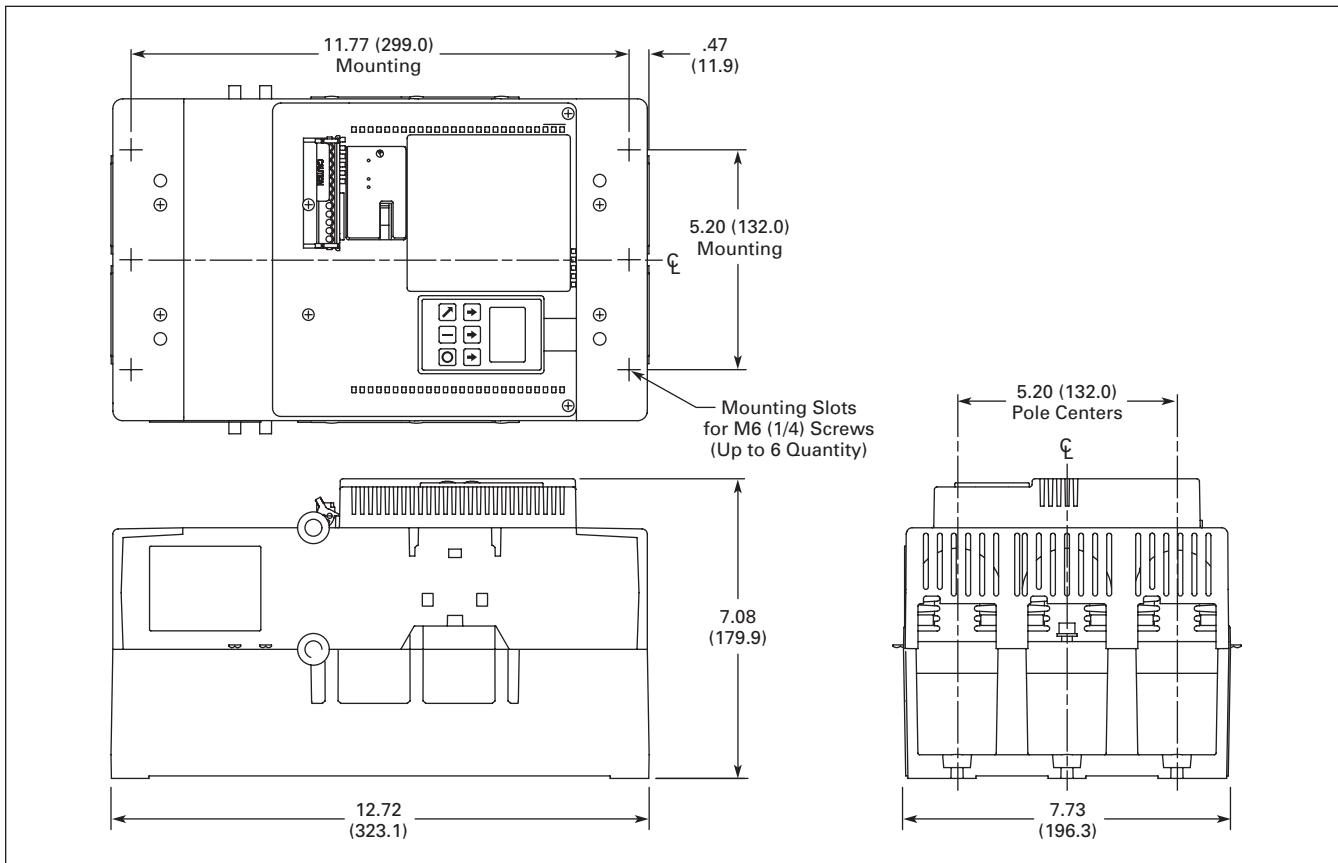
U-Frame (200 mm) S811 Approximate Dimensions in Inches (mm)
